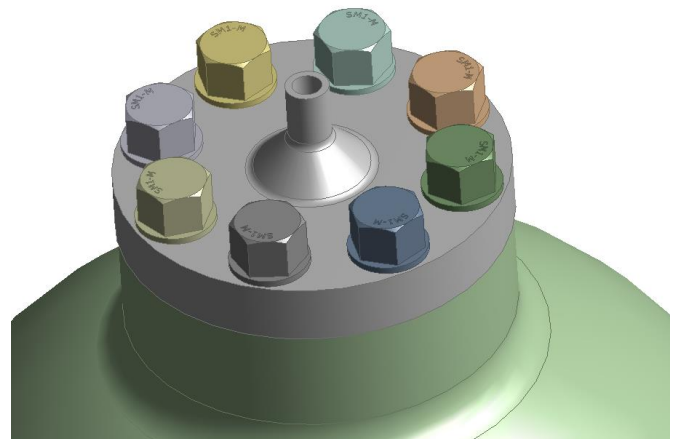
HP air bottle flanged adaptor (Courtesy: Chesterfield Special Cylinders)
